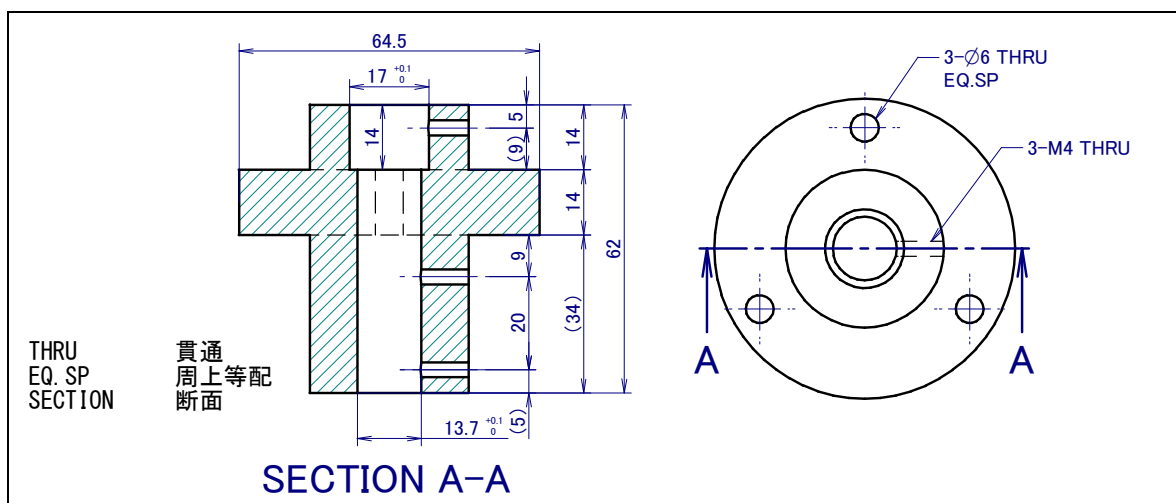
(m) Holder (Spec: A290-7220-X971)
